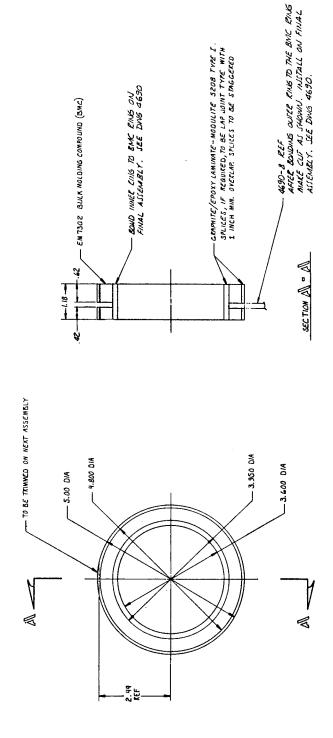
Bearing Ring, Main, Internal (WRD Drawing No. 4744).
